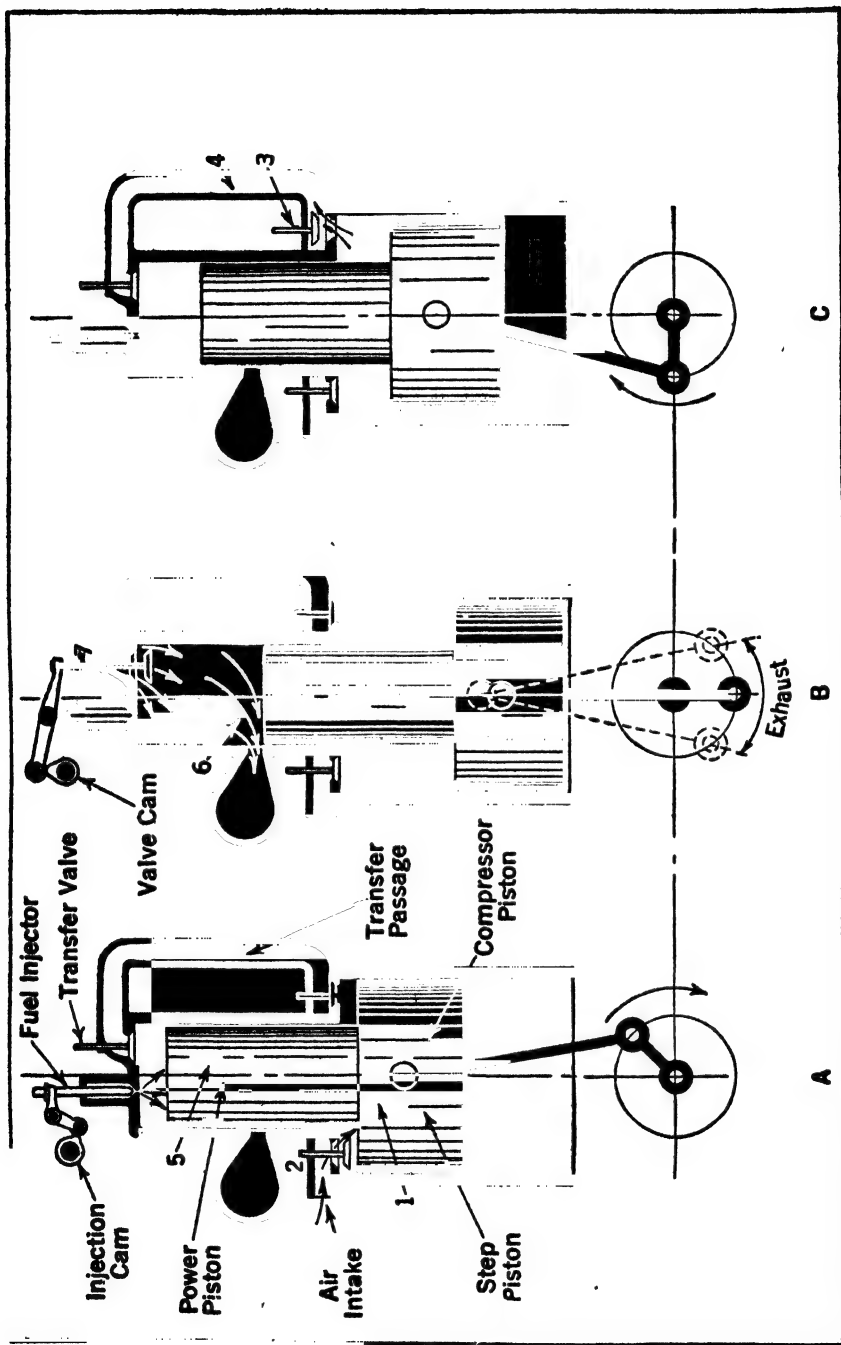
Diagrammatic Arrangement of Two-Cycle Step Piston Type Diesel Engine in which the Enlarged Portion of the Piston and the Cylinder Surrounding it Act as an Air Compressor.
